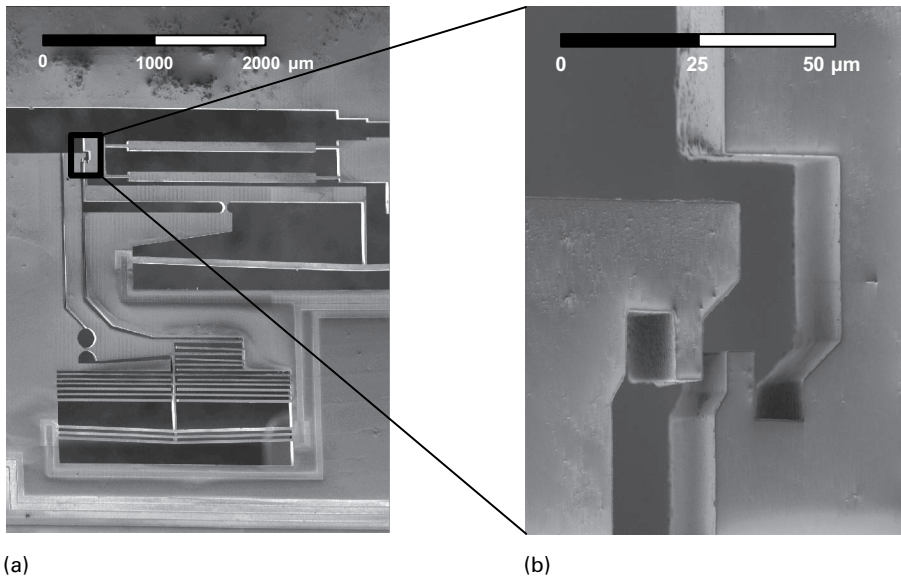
The fabricated mechanical clamp and positioning device (a), and (b) close-up of the tooth mechanism
